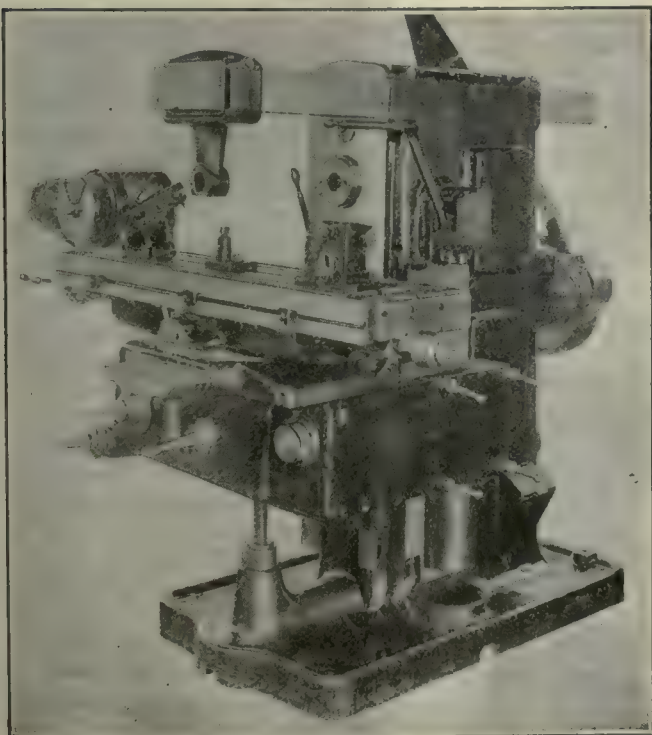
ROCKFORD NO. 3 HIGH-POWER MILLING MACHINE
